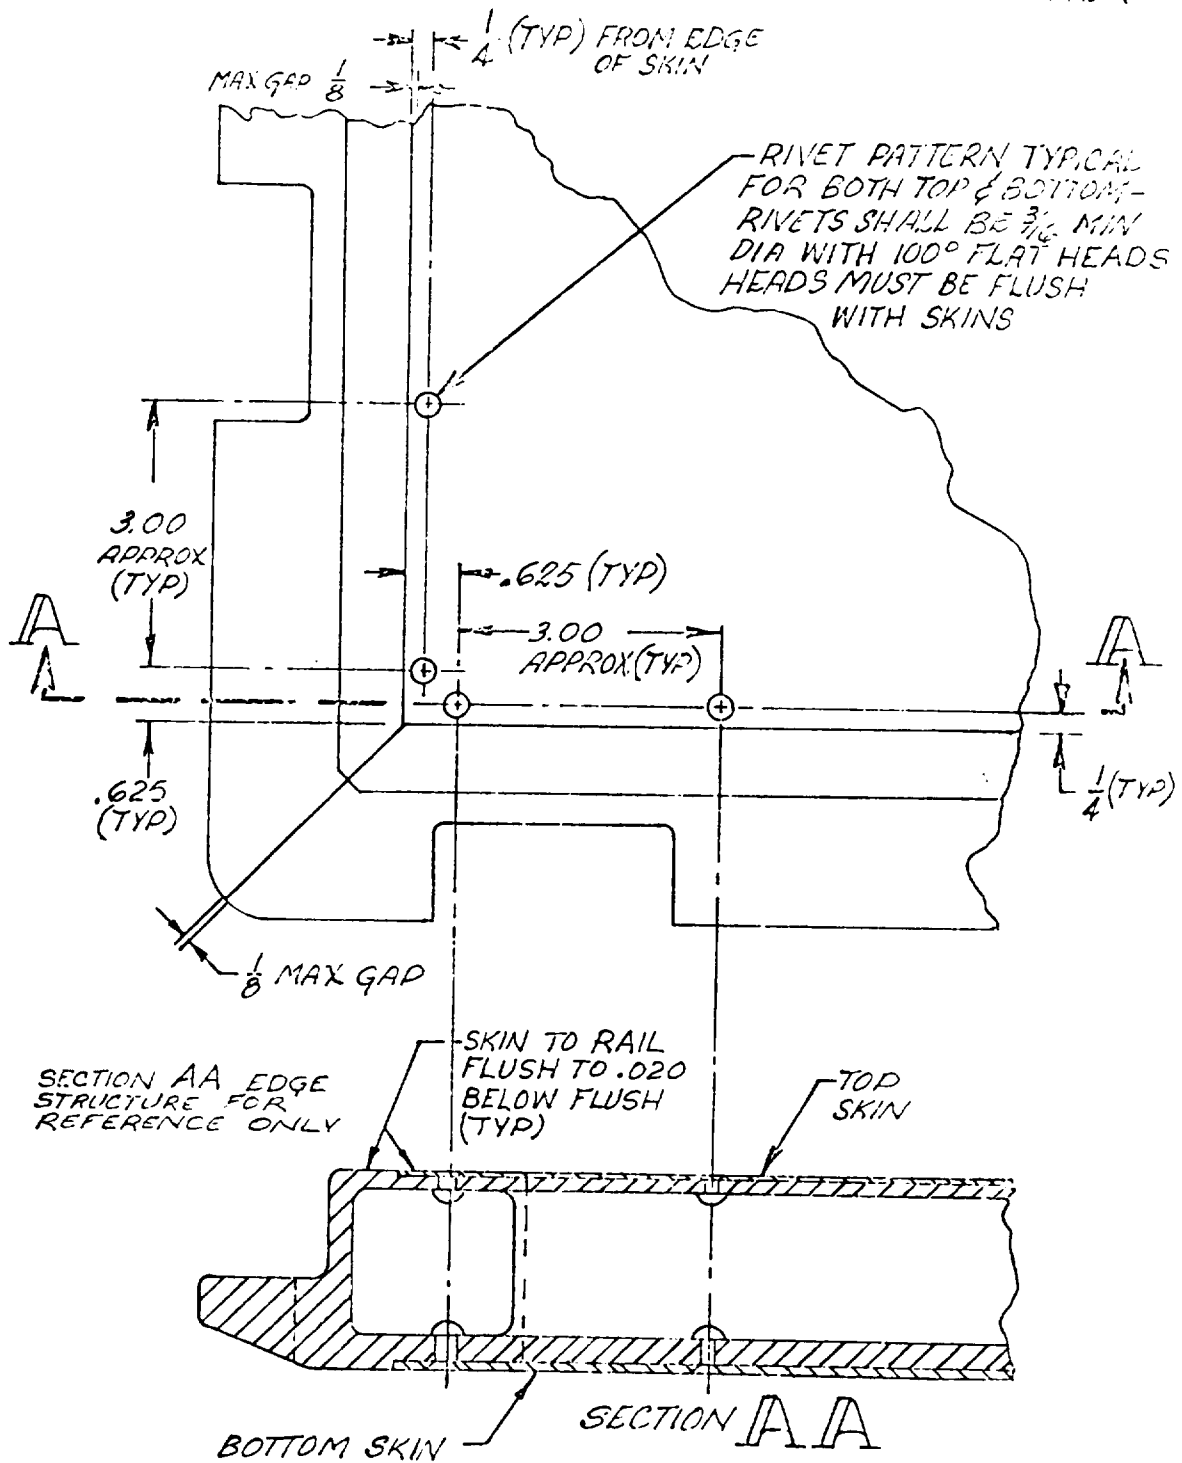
TYPICAL CORNER DETAIL & SKIN RIVET PATTERN TYPE I PALLET
